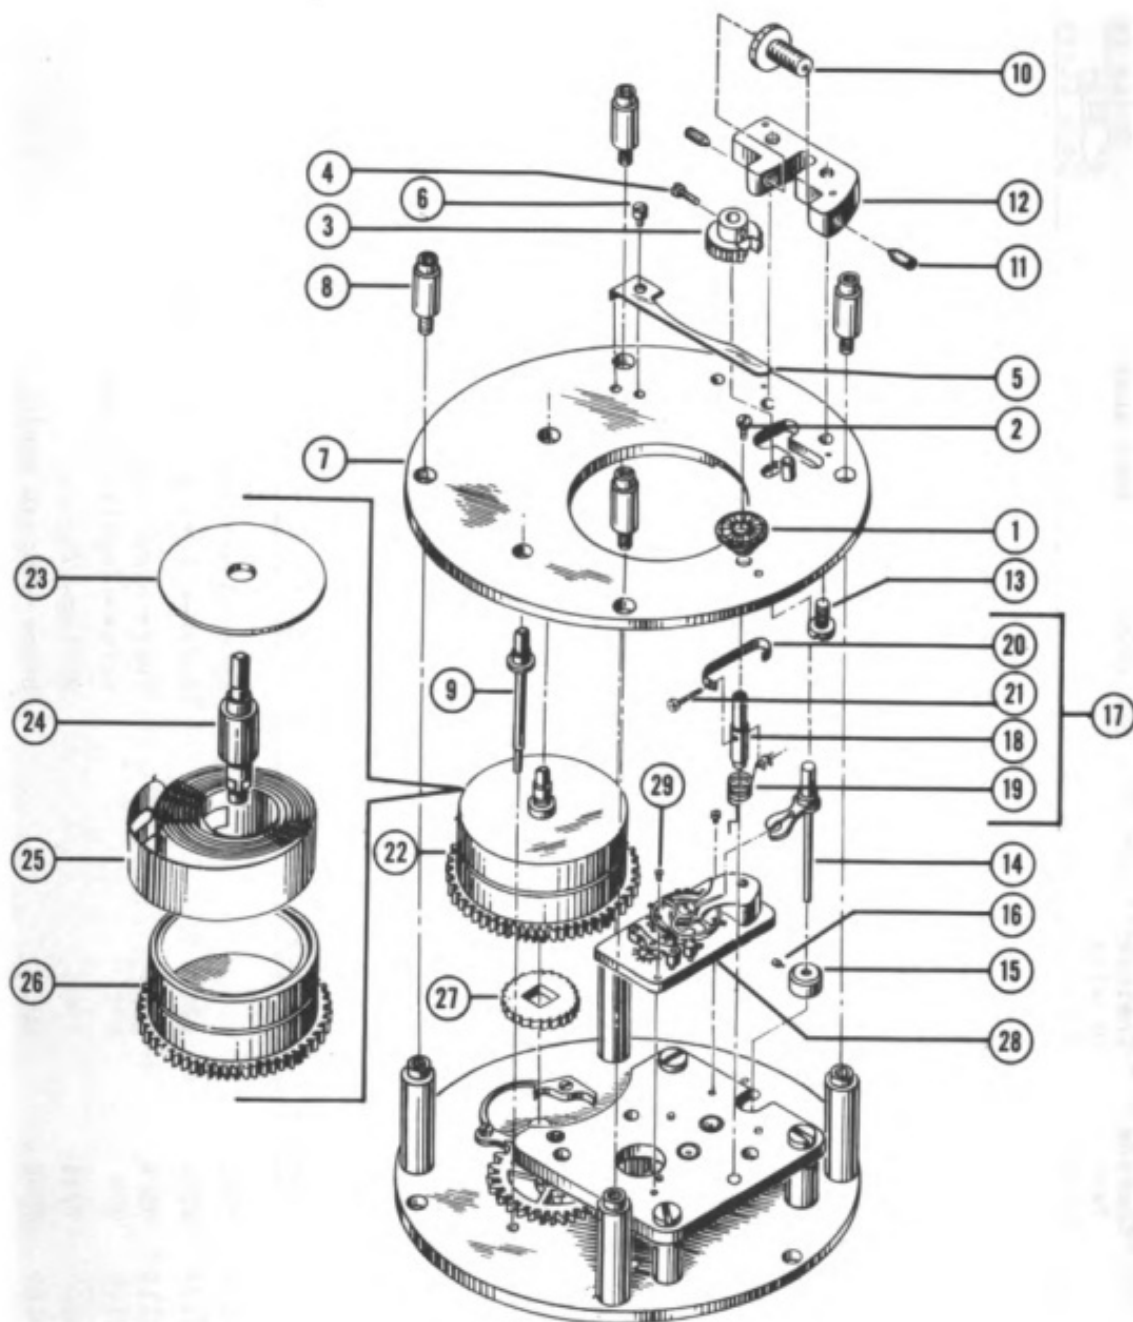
Chelsea No. 17E Boat and Deck Clock Components—Exploded View
